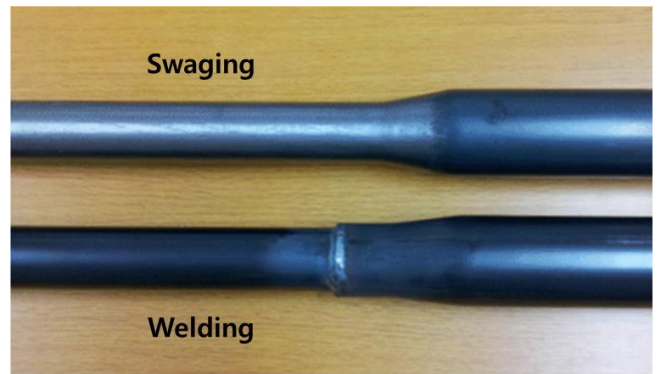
Prototypes of cowl cross bar manufactured by applying swaging and welding process
